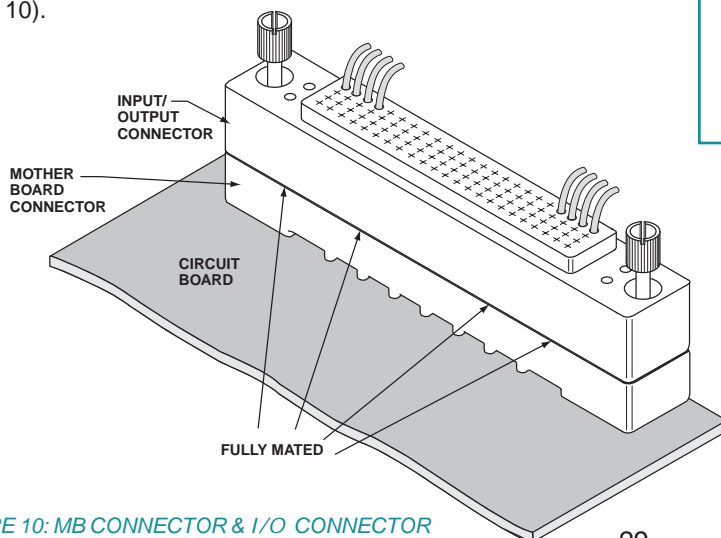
MB CONNECTOR & I/O CONNECTOR FULLY MATED CONDITION
